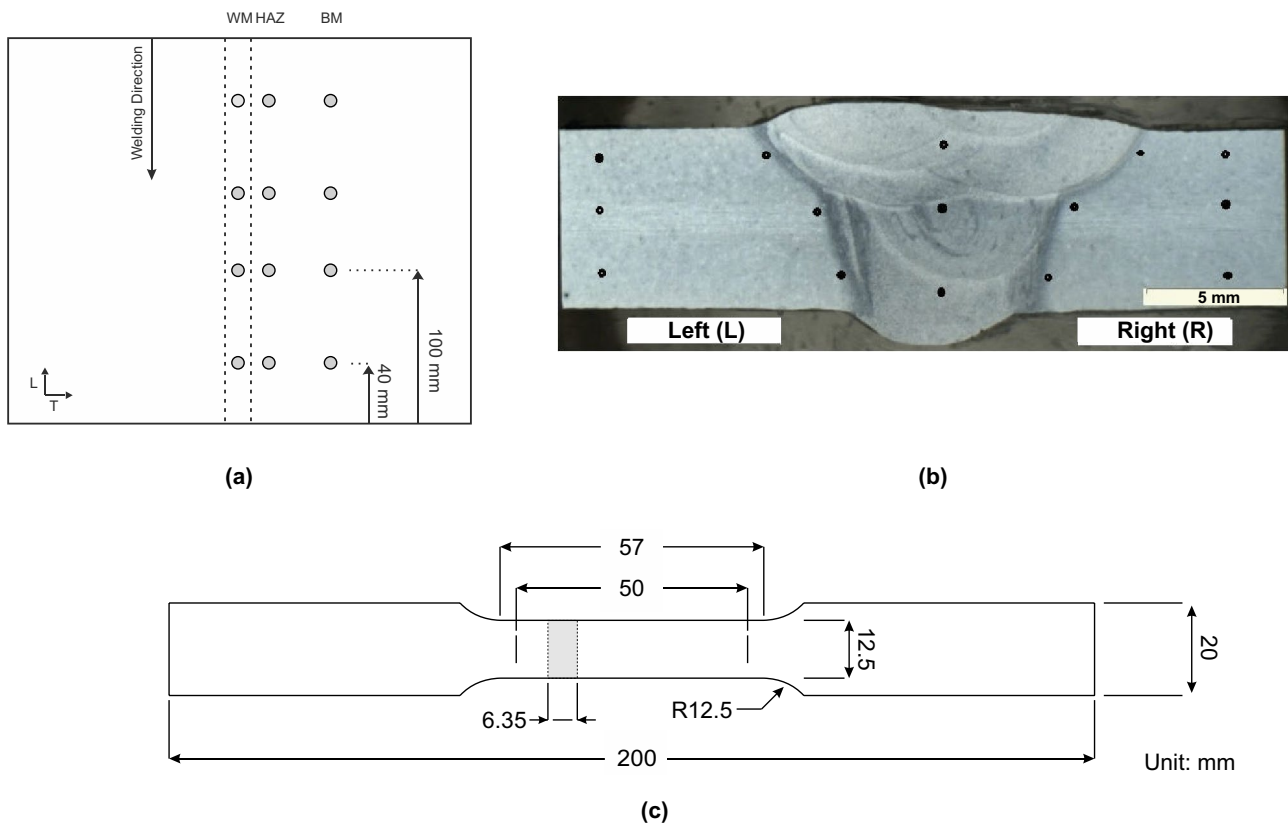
(a) Measurement points of residual stresses; (b) measurement points of hardness in the welded joint; (c) dimensions of tensile test specimen (ASTM B557M)
